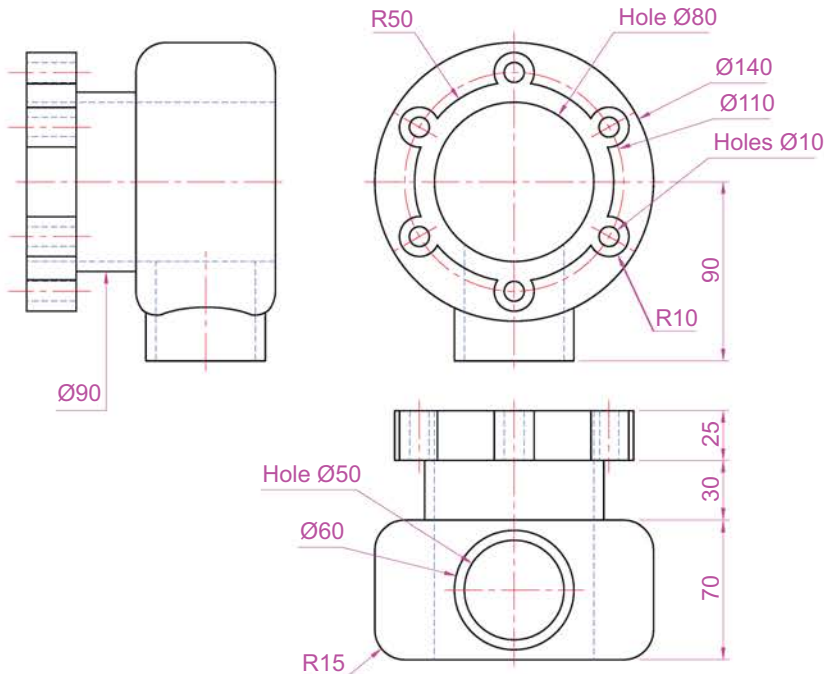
Orthographic drawing for the example of constructing a 3D model
